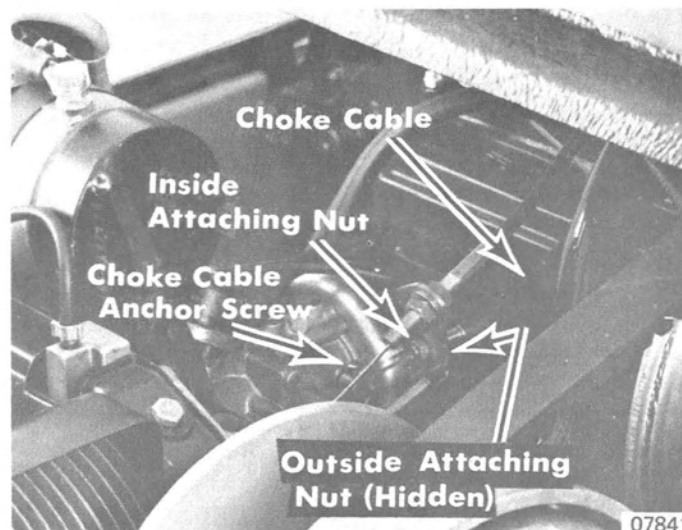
Carburetor - Mark II (Chassis Serial No. 3591478 and Below)
